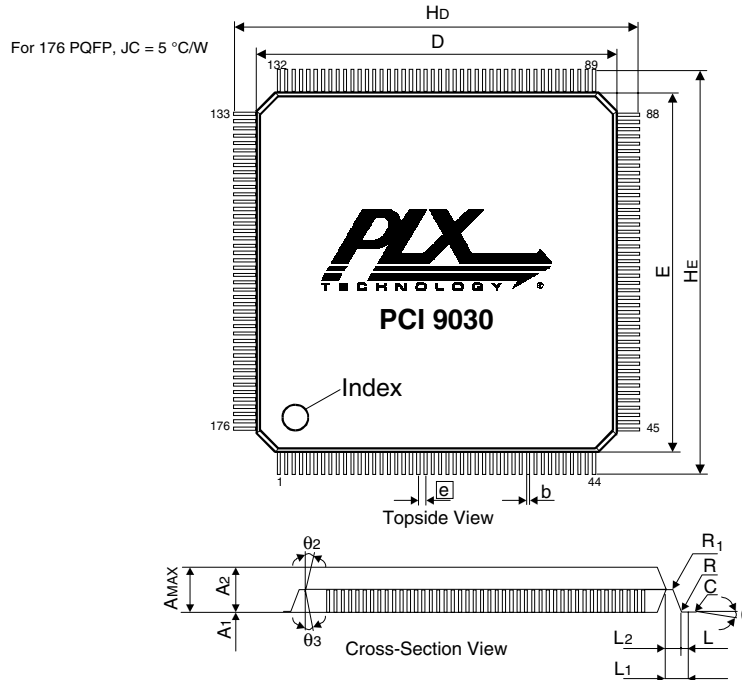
176-Pin PQFP Package Mechanical Dimensions—Topside and Cross-Section Views
